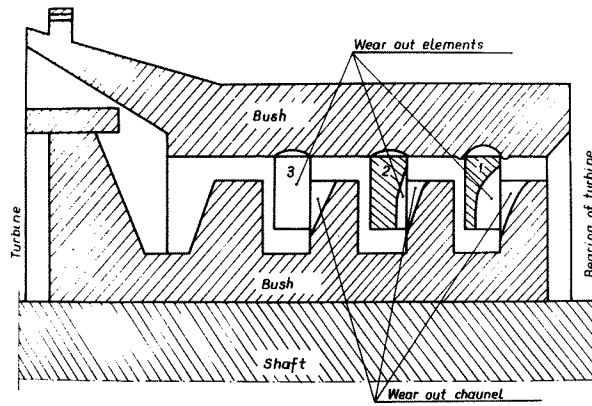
Longitudinal section of the damaged packing ring of high pressure turbine roll bearing.
